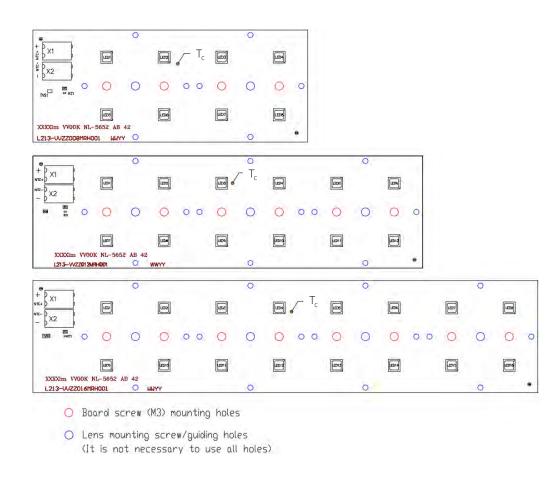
T. locations, board and lens mounting screw/guiding holes for all LUXEON XR-5050 SQR configurations.
